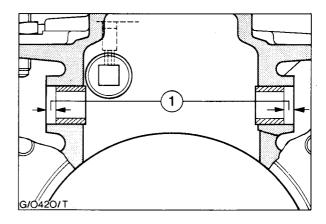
Governor Control Shaft Bushes -Locating Dimensions 1. Dimension 2,25 to 2,50 mm (0,089 to 0,098 in)
